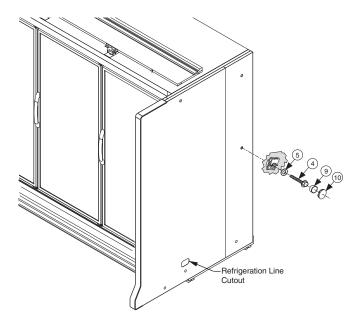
Install Dry Goods & Bump Out Connecting Partition
